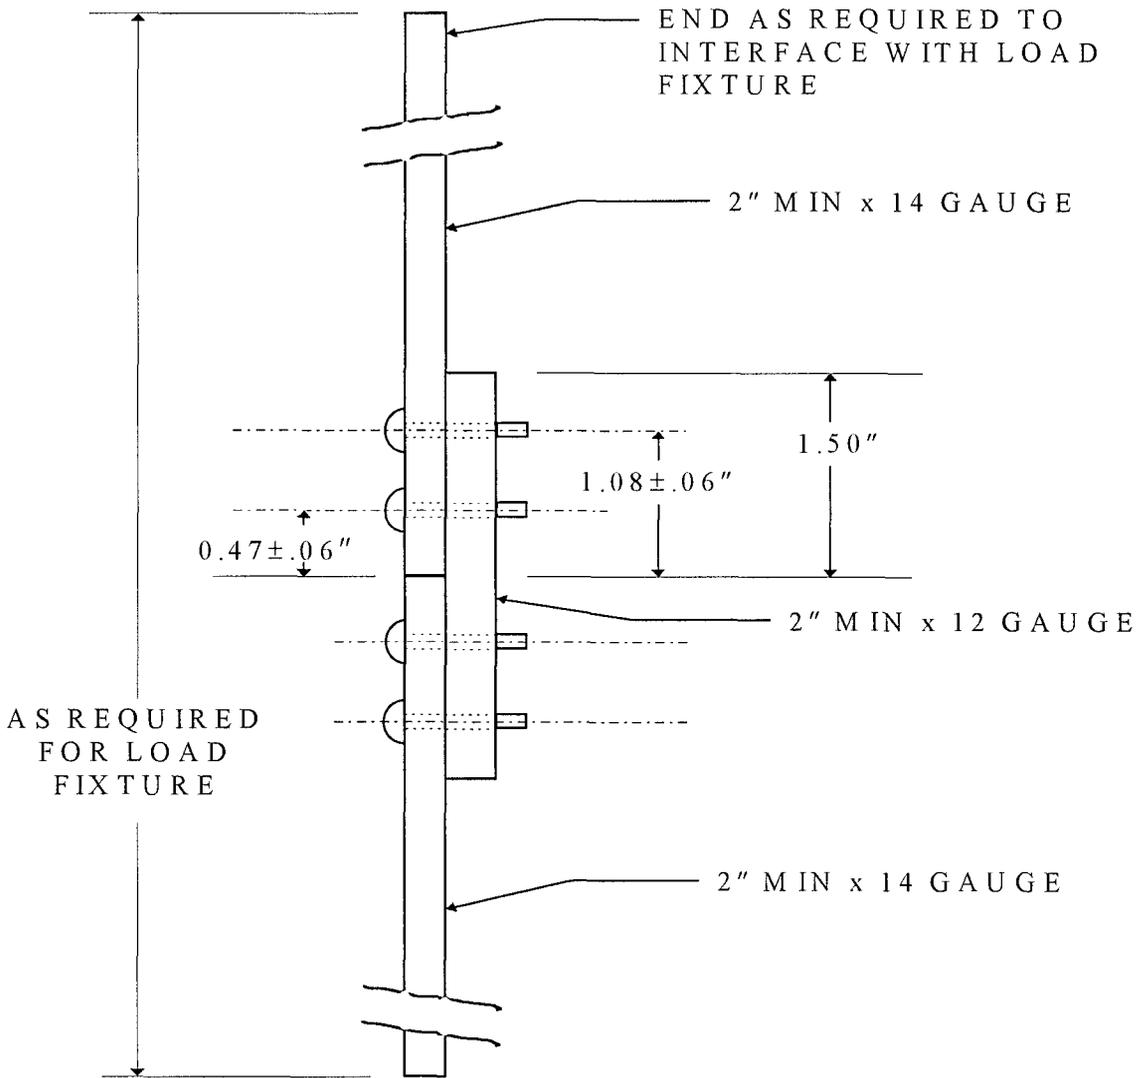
TEST SPECIMEN SIDE VIEW
